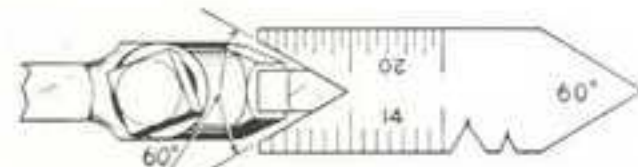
Cutter Bit for Cutting Screw Threads is Ground to 60° Center Gauge
